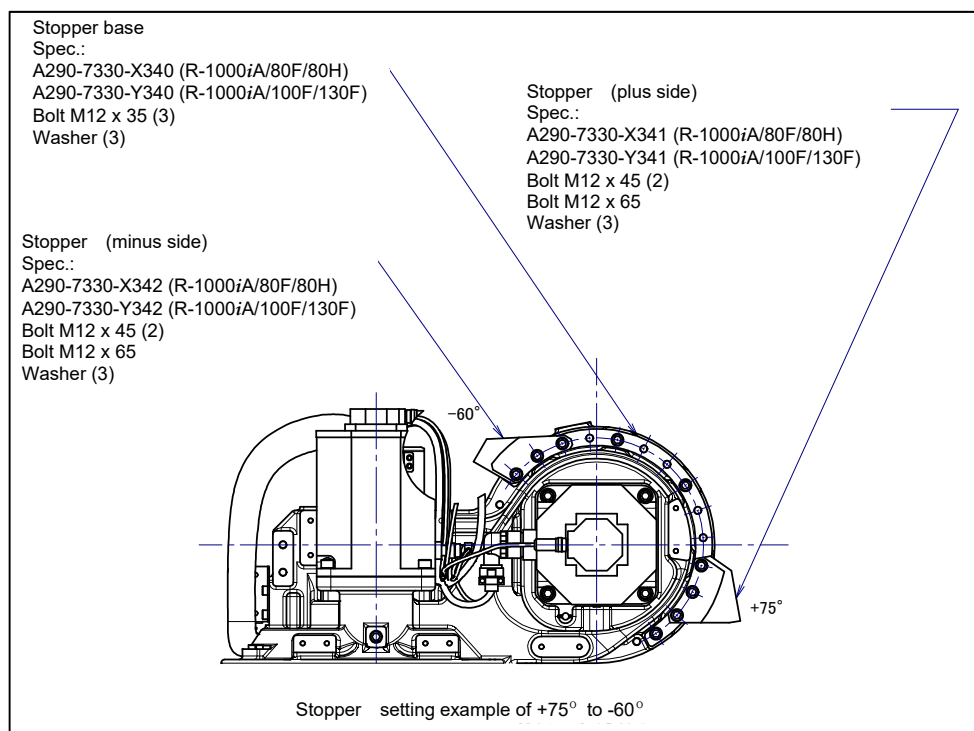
(h) Setting example of J2-axis adjustable mechanical stopper (R-1000iA/80F/100F/130F/80H)
